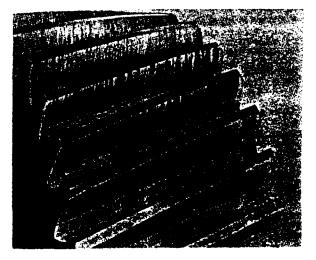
Tooth Scoring From Marginal Lubrication (vertical pull marks)
